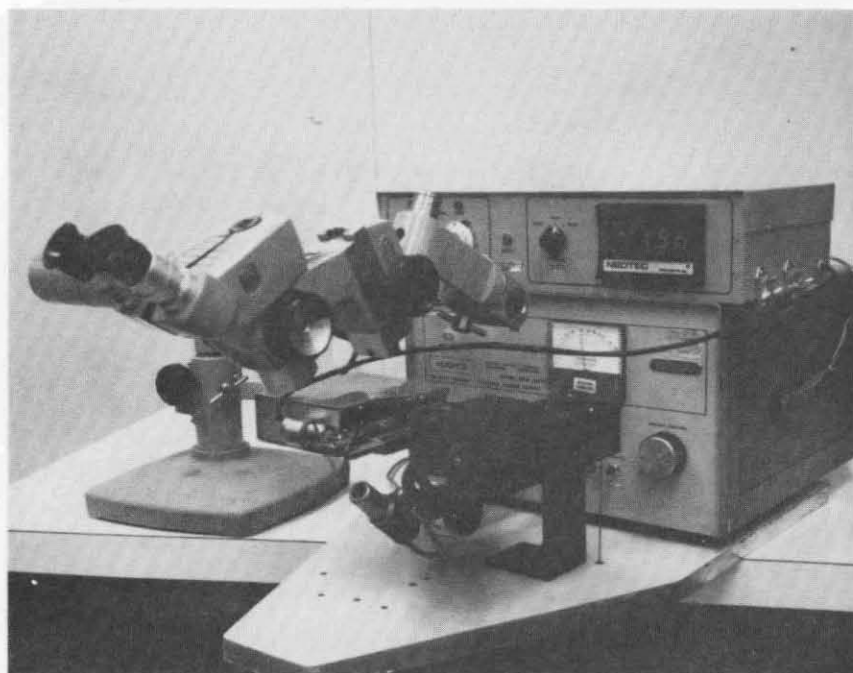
GSFC Weld Quality Monitor Mounted on Both Sippican and Hughes Weld Power Supplies
